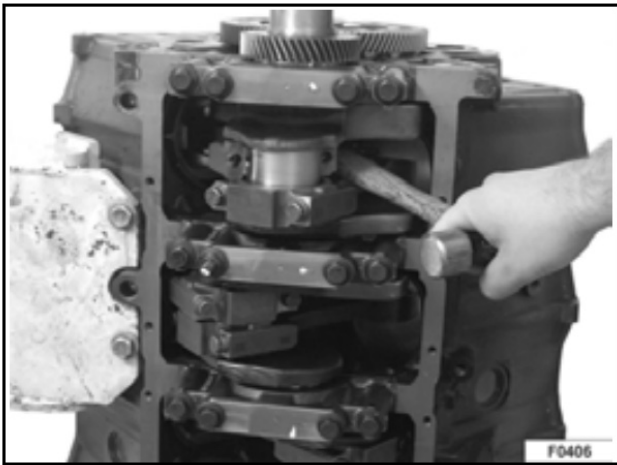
Pushing the New Style Connecting Rod and Piston Out Of the Cylinder Bore
